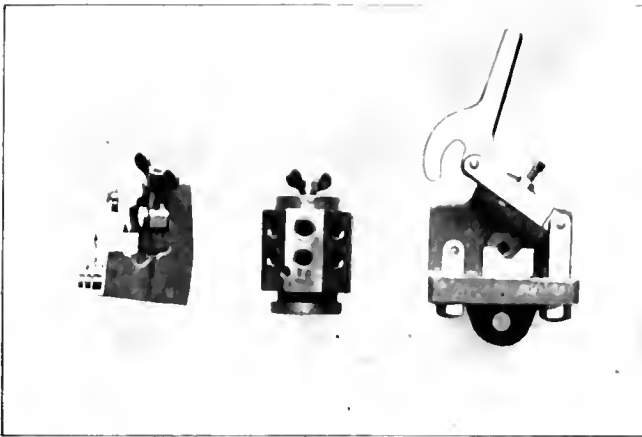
Three Types of Drill Jigs, each of which is equipped with Different Locking Devices
